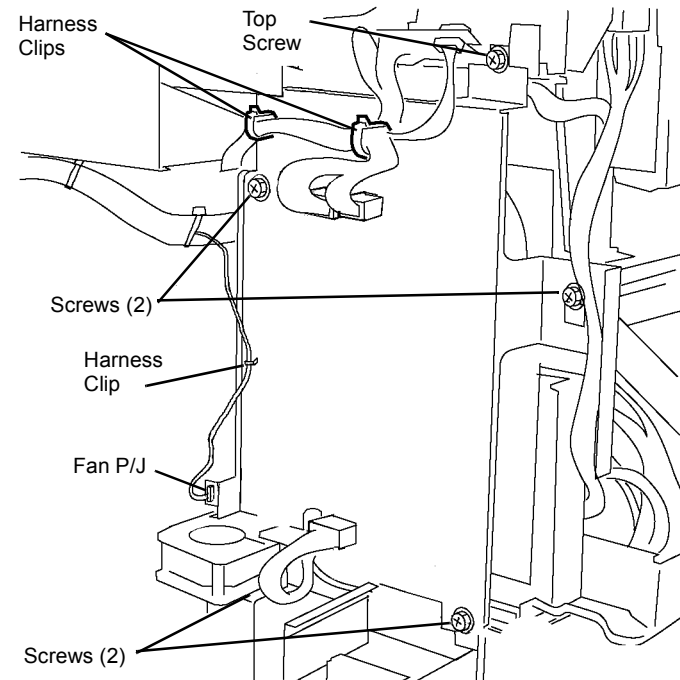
Removing 24 VDC LVPS Bracket Assembly
